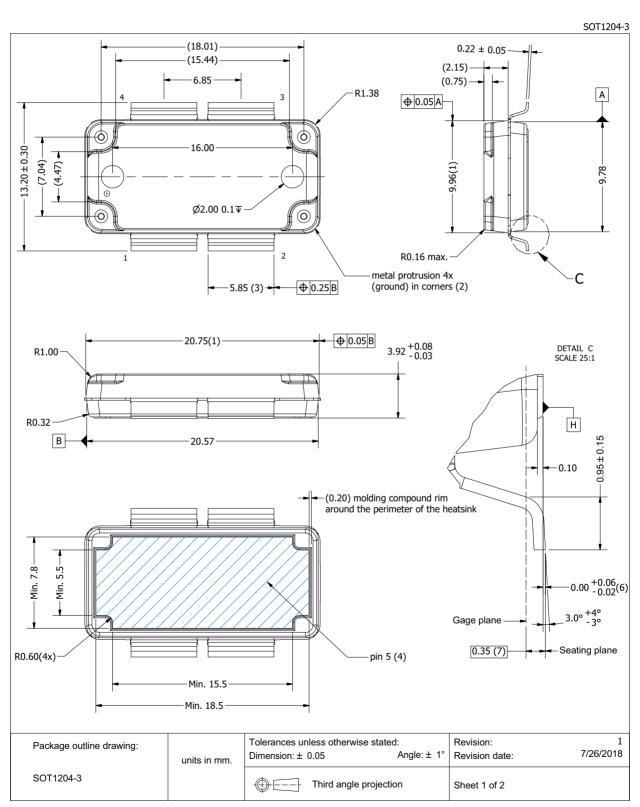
Package outline SOT1204-3 (sheet 1 of 2)
